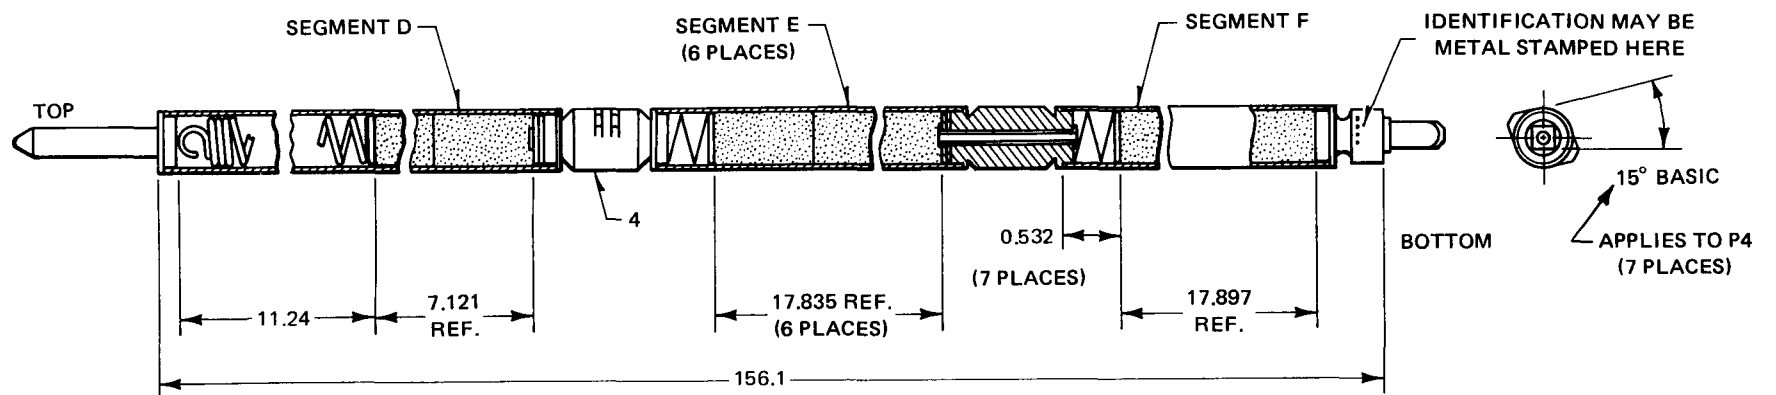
Fuel Assembly Drawing for 2.62% Enriched 8 x 8 Reload Fuel
